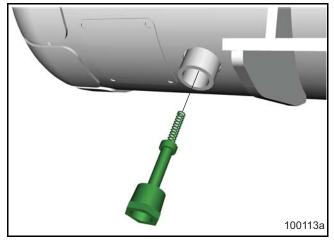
Fuel Tank Pressure Relief Valve (Typical)
